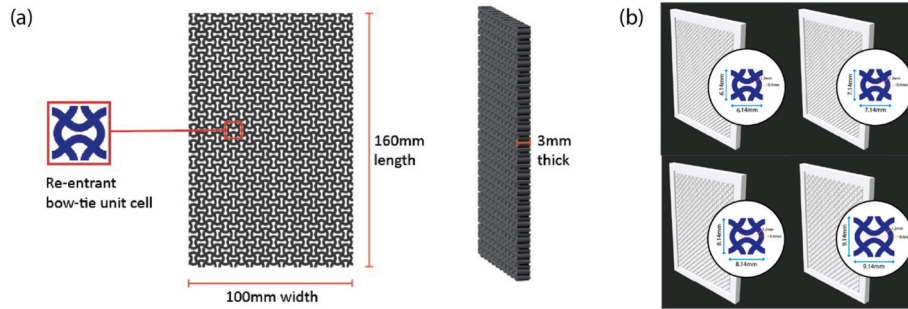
(a) Illustration of CAD model dimensions for auxetic specimen with bow-tie shape and honeycomb structure; (b) Mold cast with cavity in auxetic pattern in dimension 6.14 mm, 7.14 mm, 8.14 mm and 9.14 mm.
